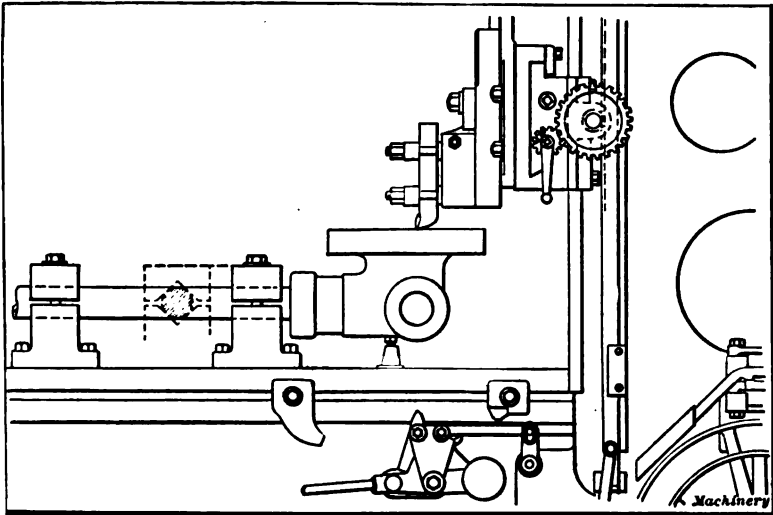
Piston-rod and Attached Cross-head Mounted in V-blocks for Planing
